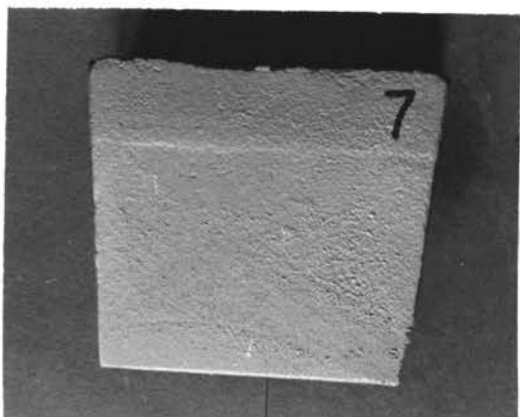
Photographs of surfaces of castings poured in molds containing silica sand and +100 mesh magnetite.
